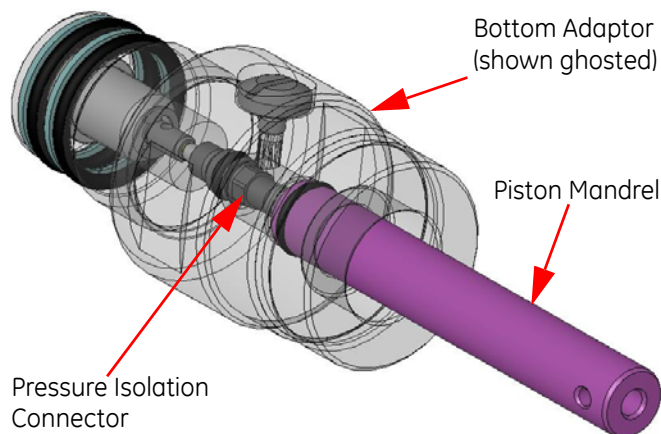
Piston Mandrel installed in the Bottom Adaptor
